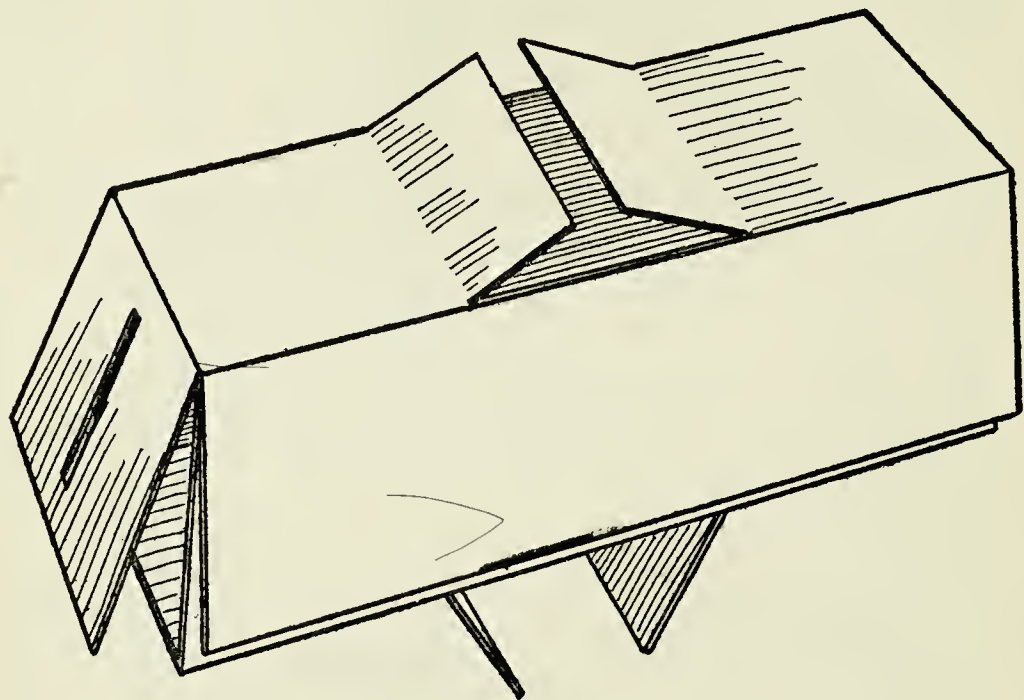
THIS FOLDED PIECE FORMS THE CENTER AND TWO ENDS OF THE CROSS-SHAPED BOX
